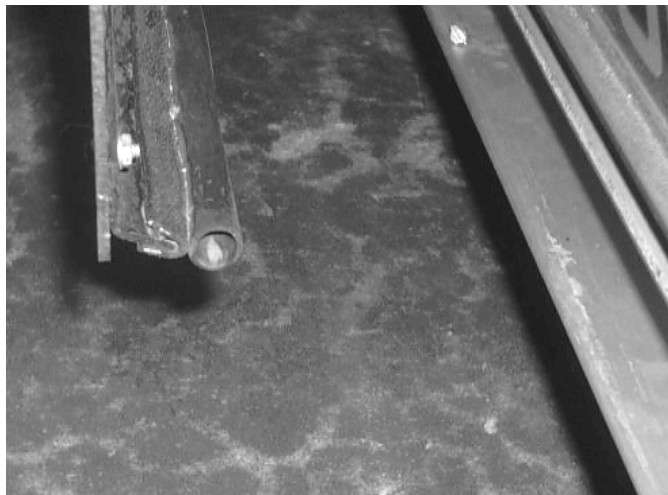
INSTALL DRIVER SIDE PANEL
